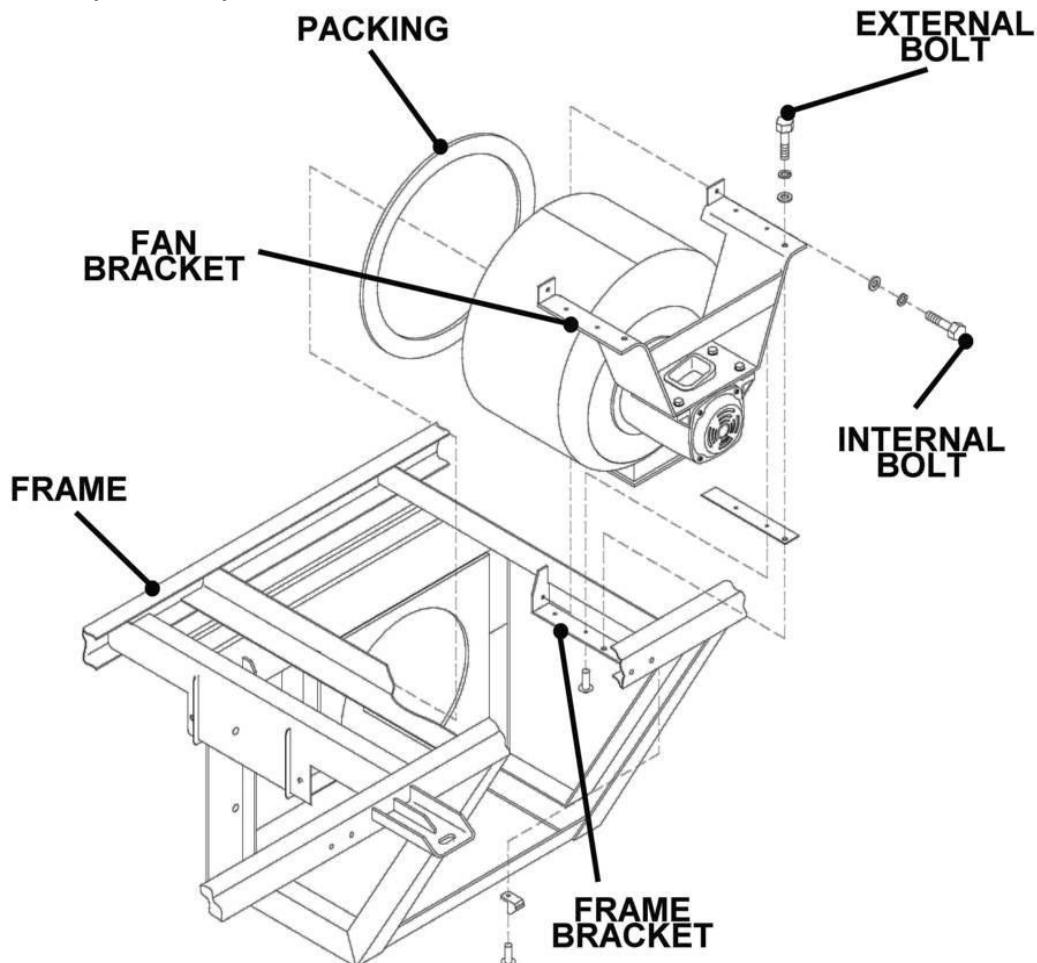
INVERTER COOLING MOTOR FAN REMOVAL / INSTALLATION
